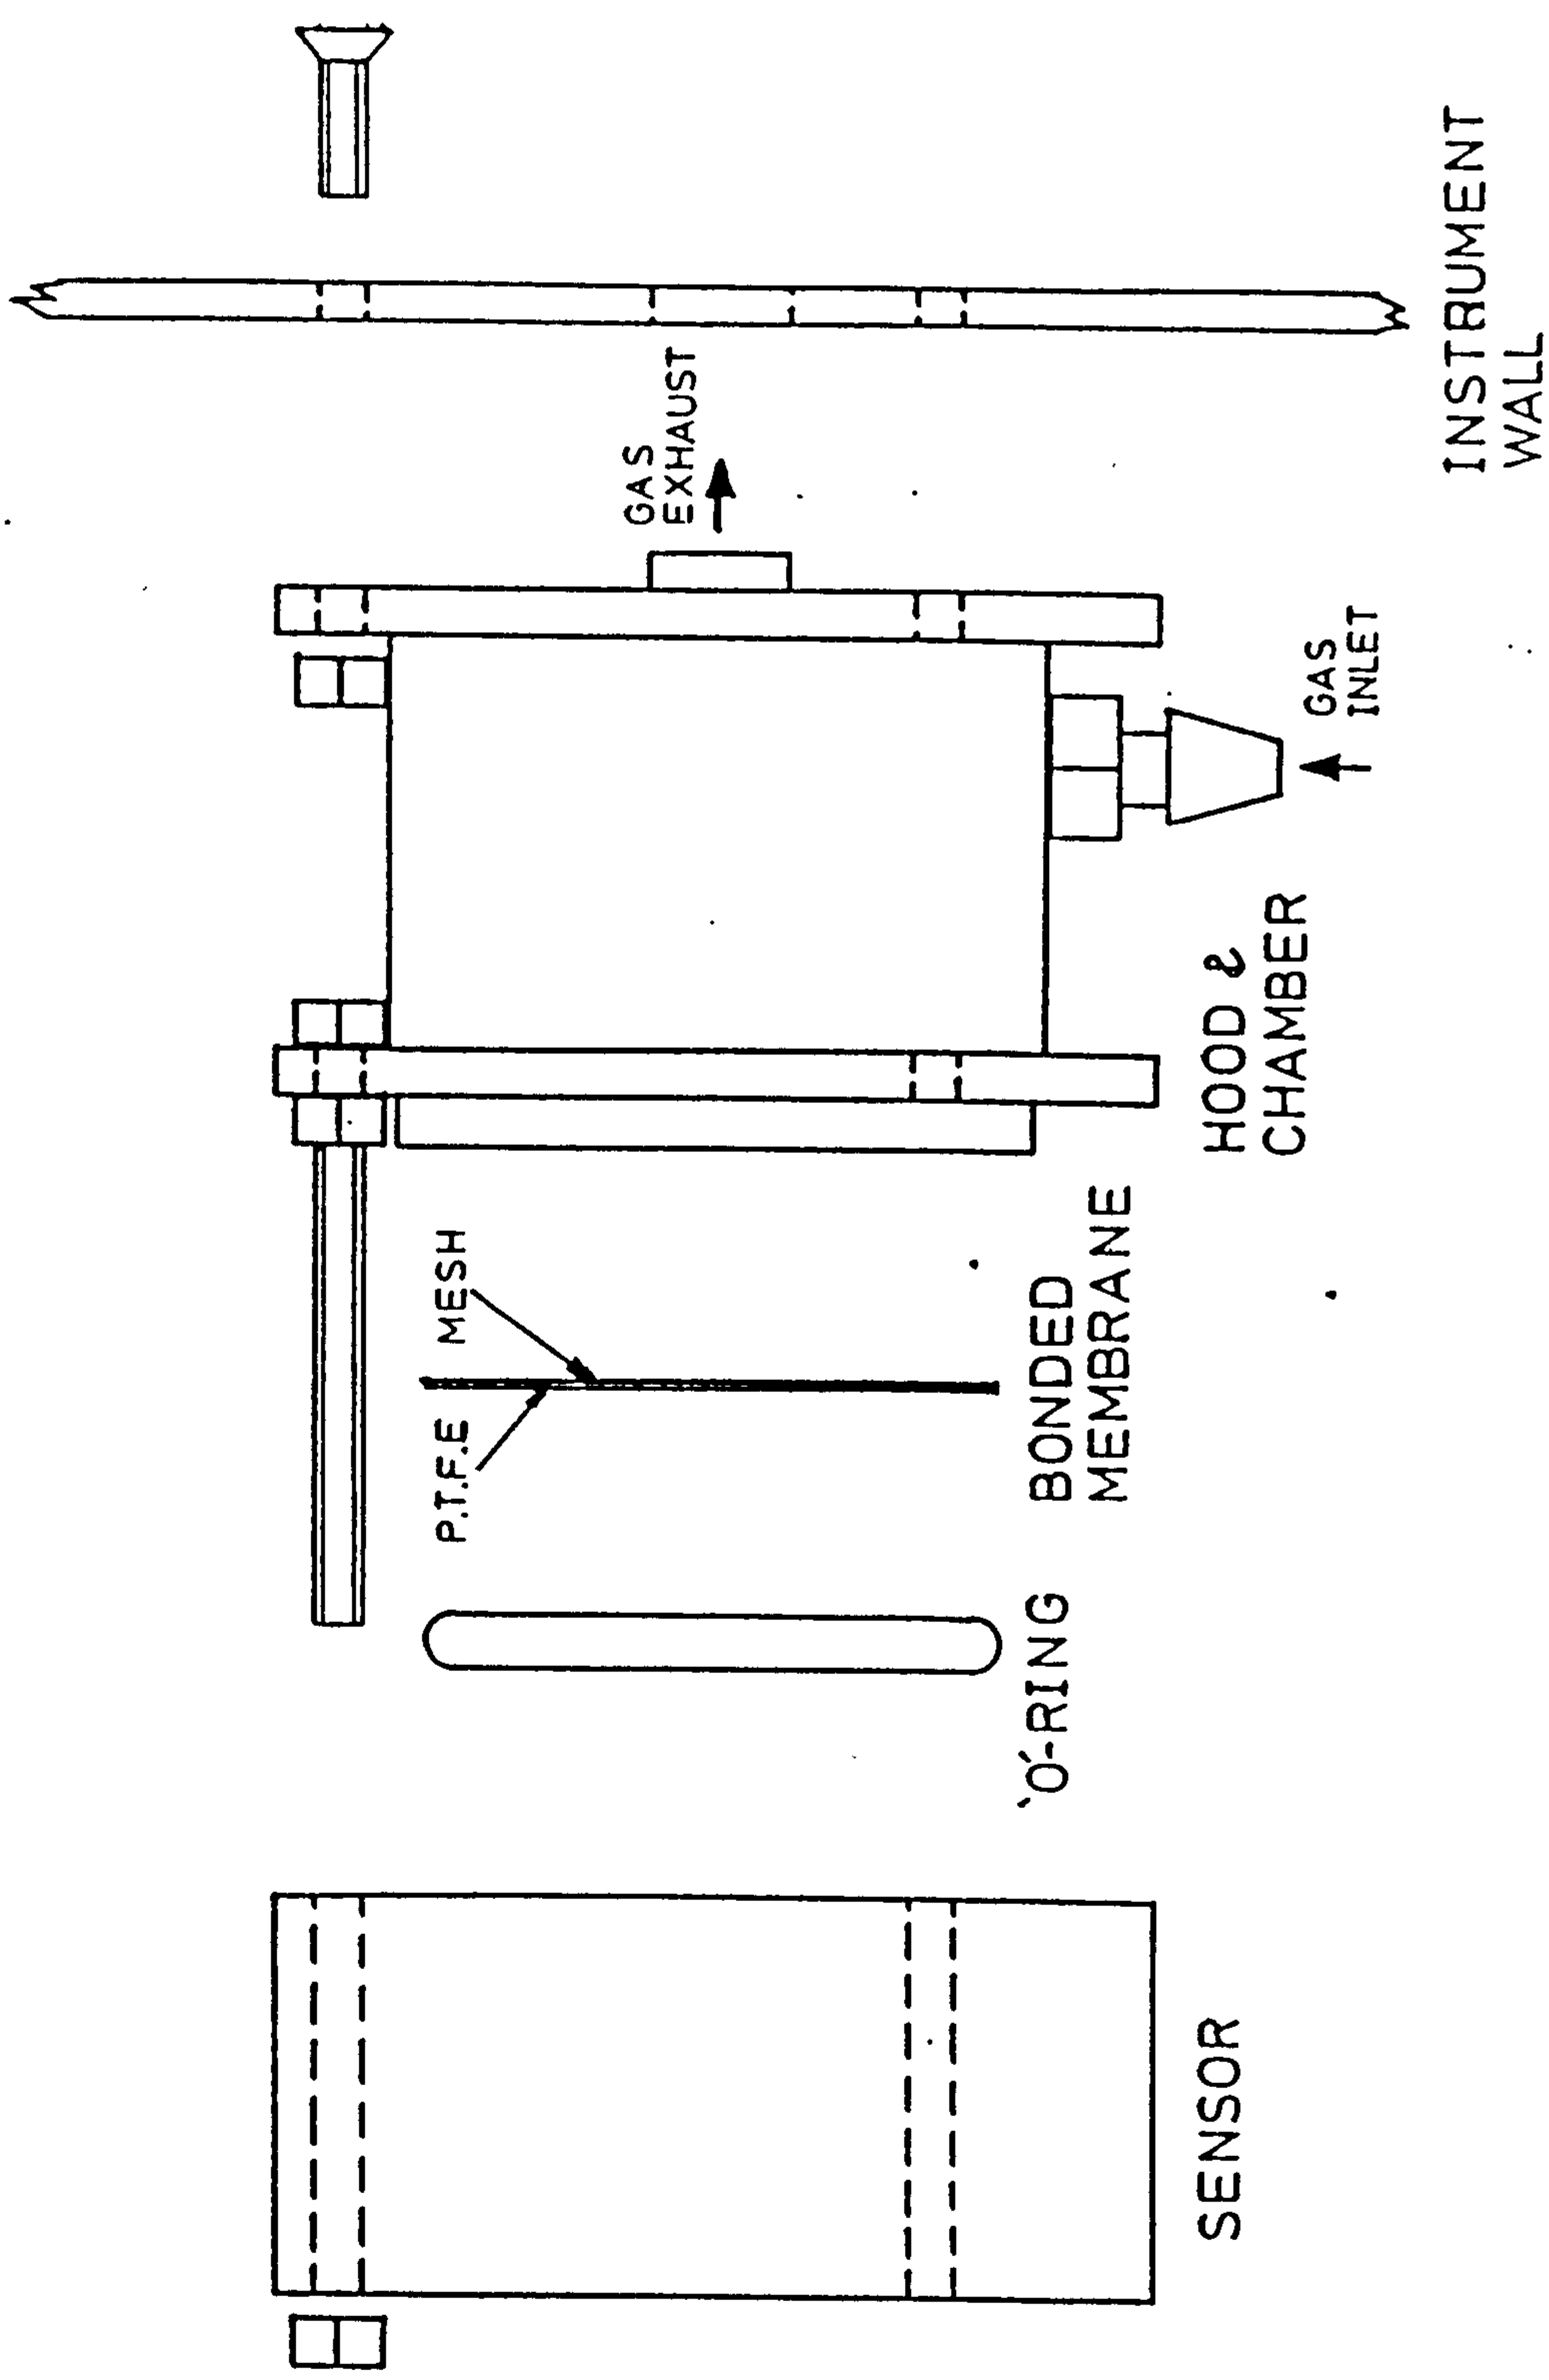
PLUG MOULDING FOR DIFFUSION MODE SENSOR MOUNTING.
